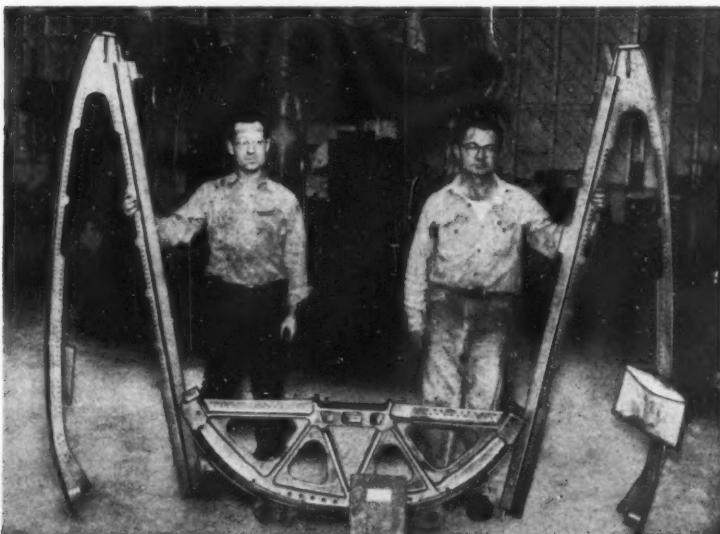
The Three Basic Parts of the Fuselage Bulkhead Ready for Final Assembly. The Open Area Between the Arms of Each V-strut is Subsequently Filled-in with Aluminum Sheet and Cross-members
